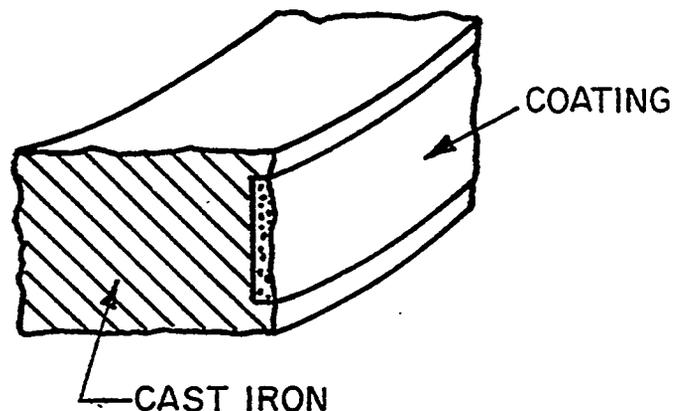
The Piston Ring Face Geometry Used to Accept Hard Coatings for Coal-Fueled Diesel Engine Service
